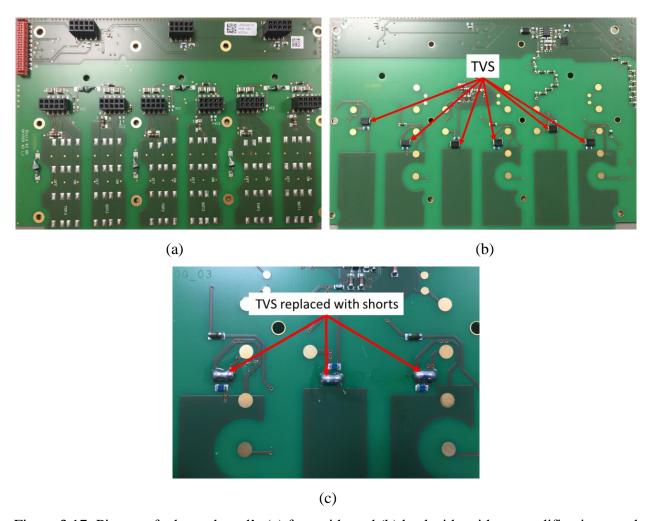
Picture of adapter board's (a) front side and (b) back side without modifications, and (c) back side after modifications (zoomed)
